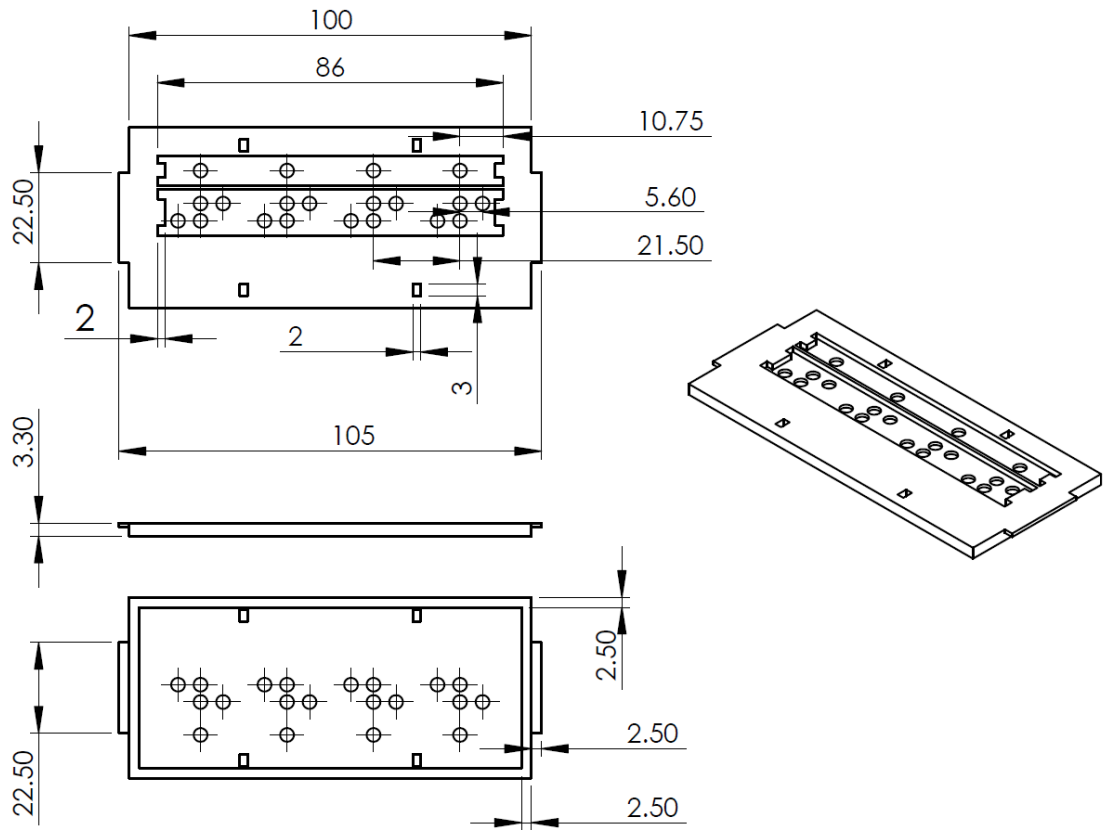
Dimensions [mm] for fabrication tooling (Support-alignment unit)
